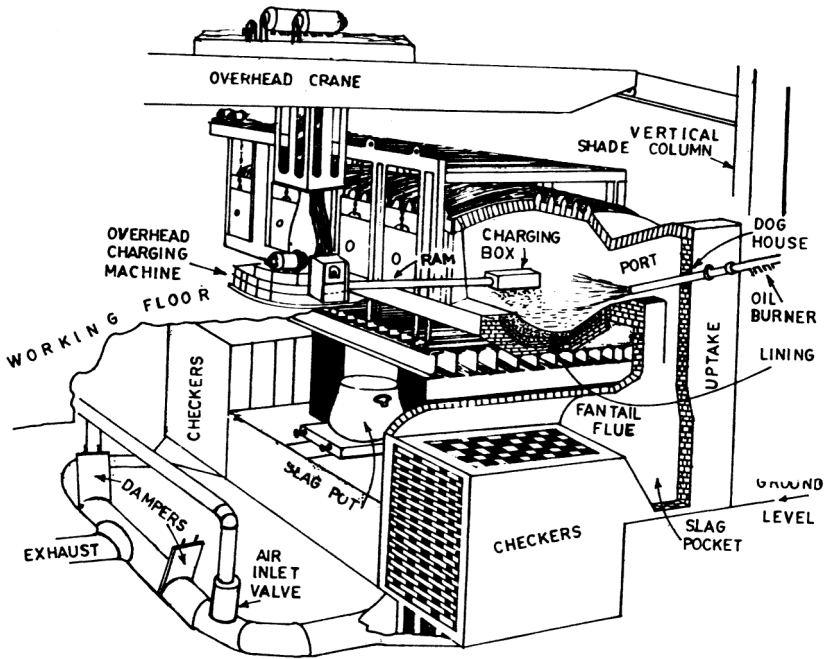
Sketch of an open-hearth furnace with cutaway sections to show the details of construction, method of charging, firing, etc.
